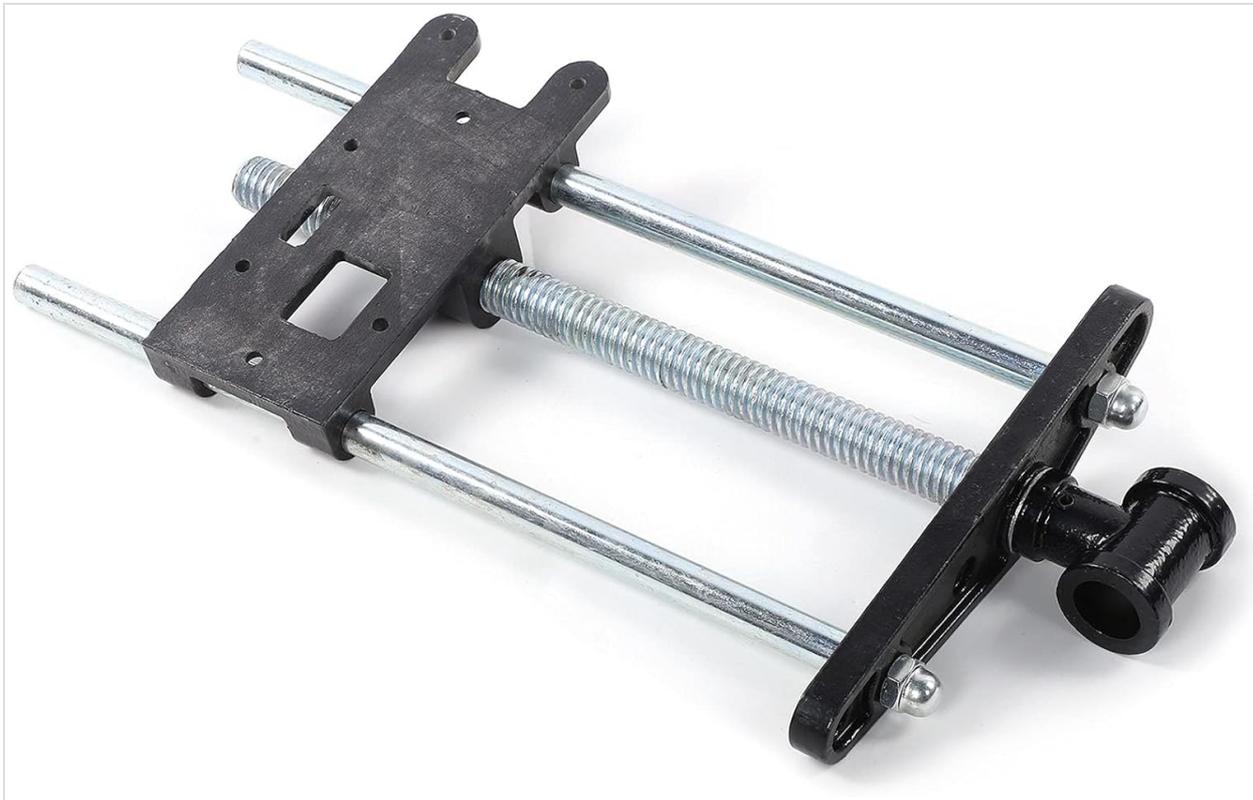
Underside view of the vise, highlighting the base plate and mounting slots for secure attachment to a workbench.
